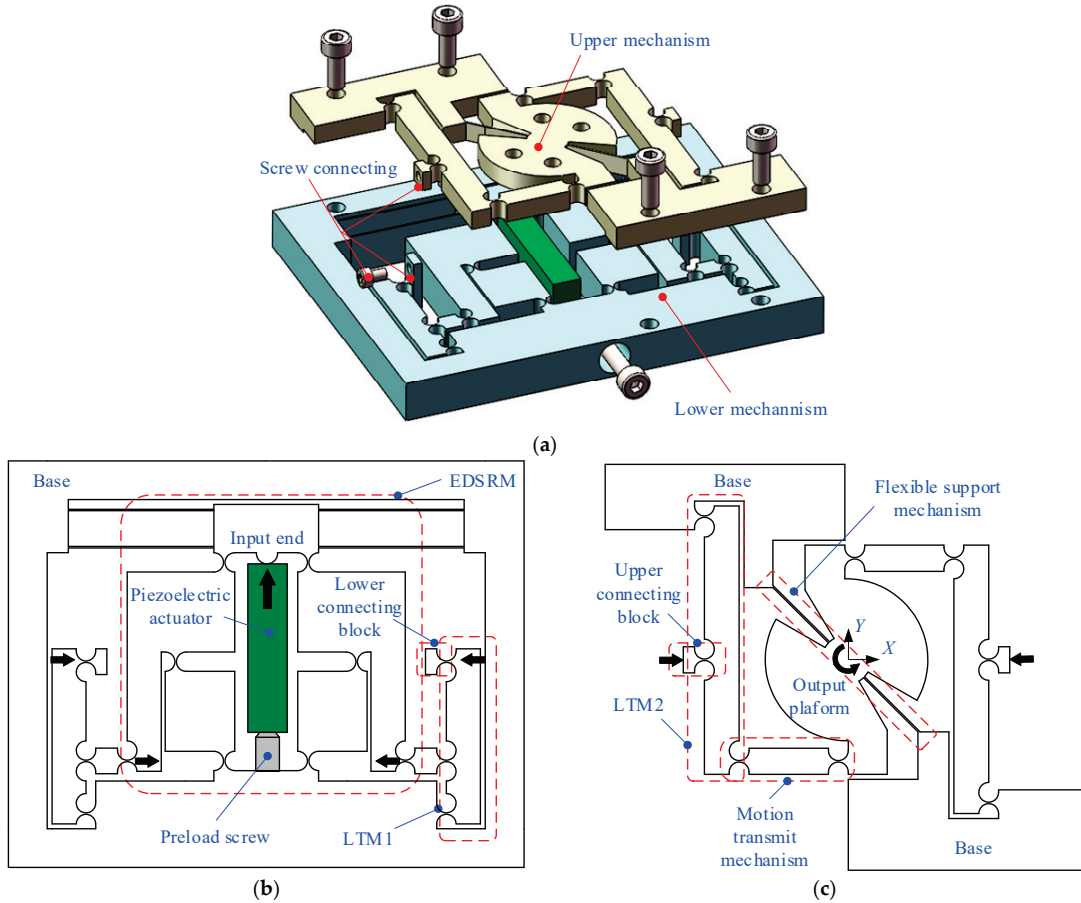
Mechanical design of the RA-DFM: (a) the assembly diagram; (b) the lower mechanism; (c) the upper mechanism.
